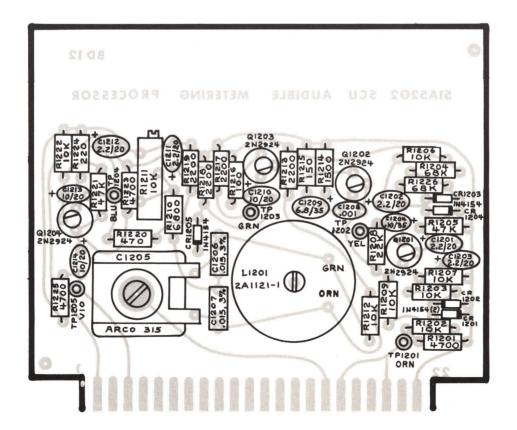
SCU Audible Metering Processor (Board 12), Parts Location
